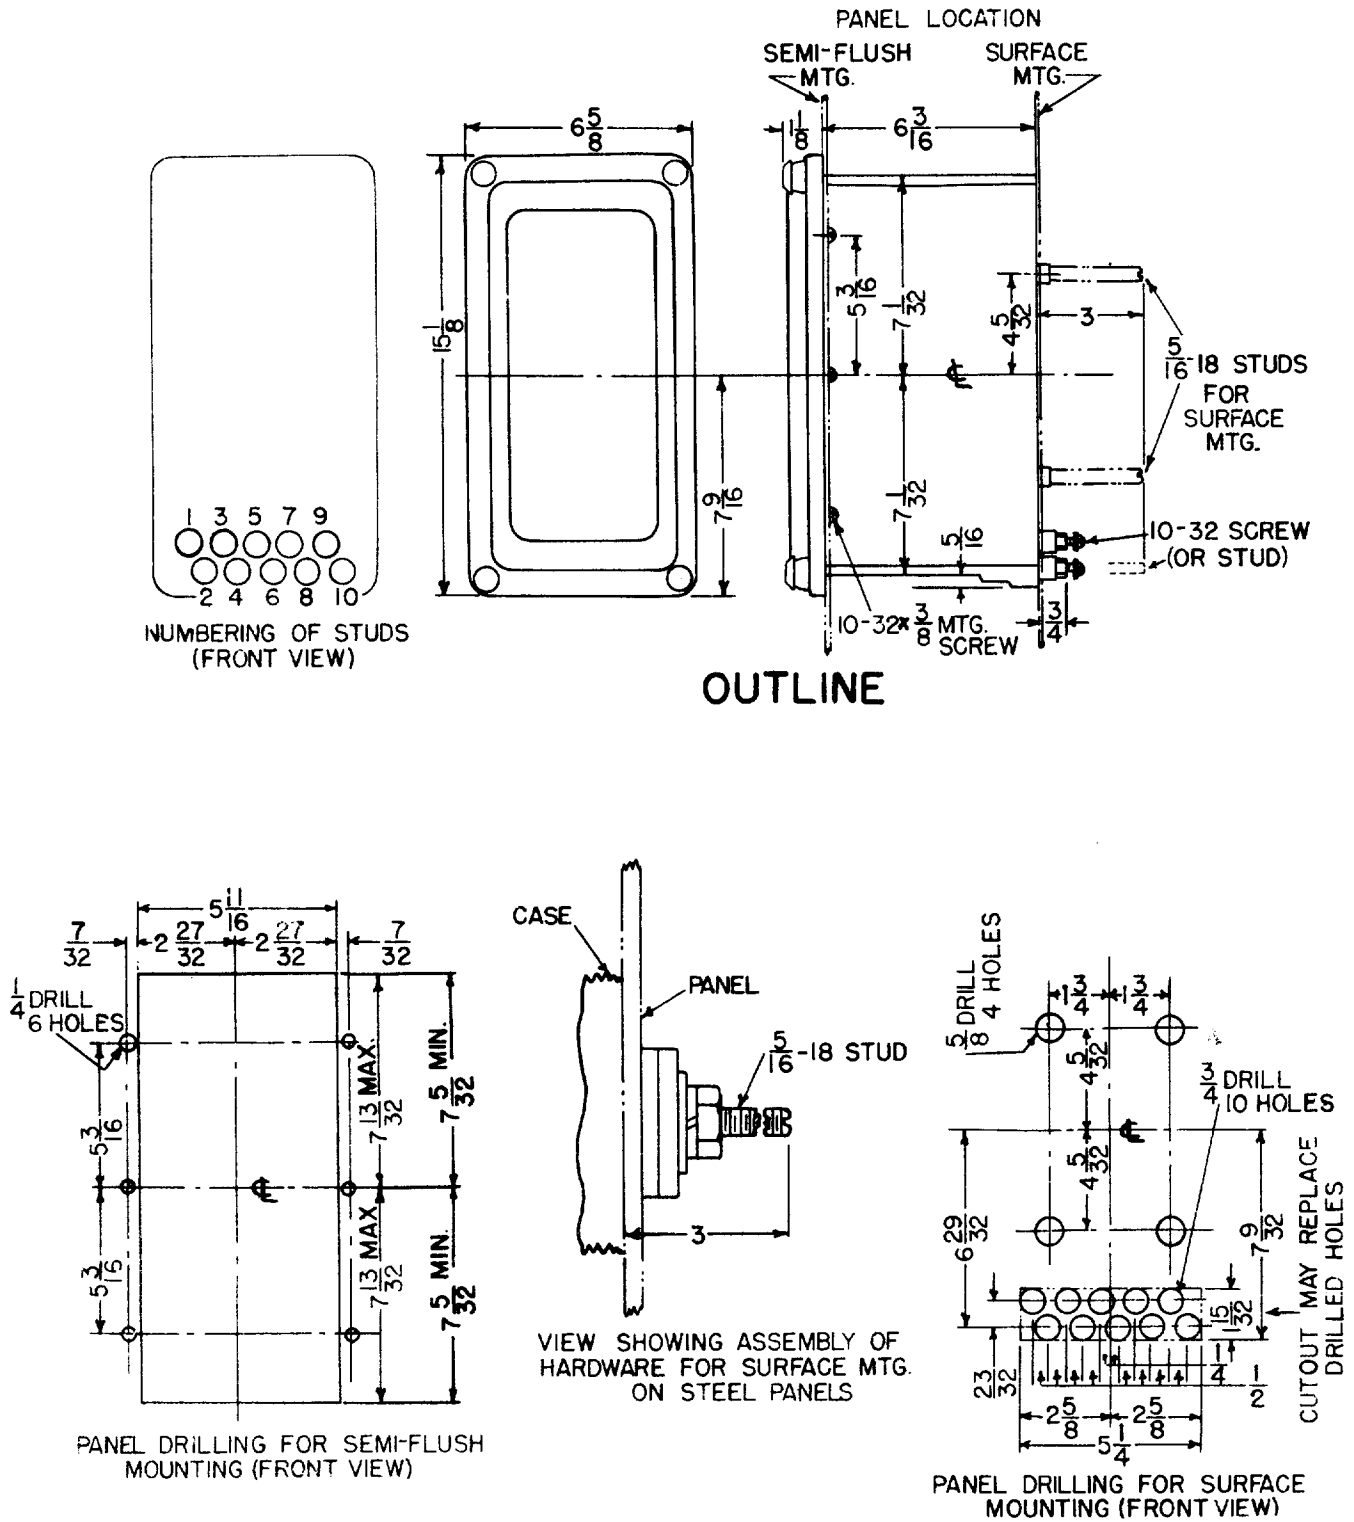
(6209273-3) Outline And Panel Drilling Dimensions For Type BFC11A Relay.
